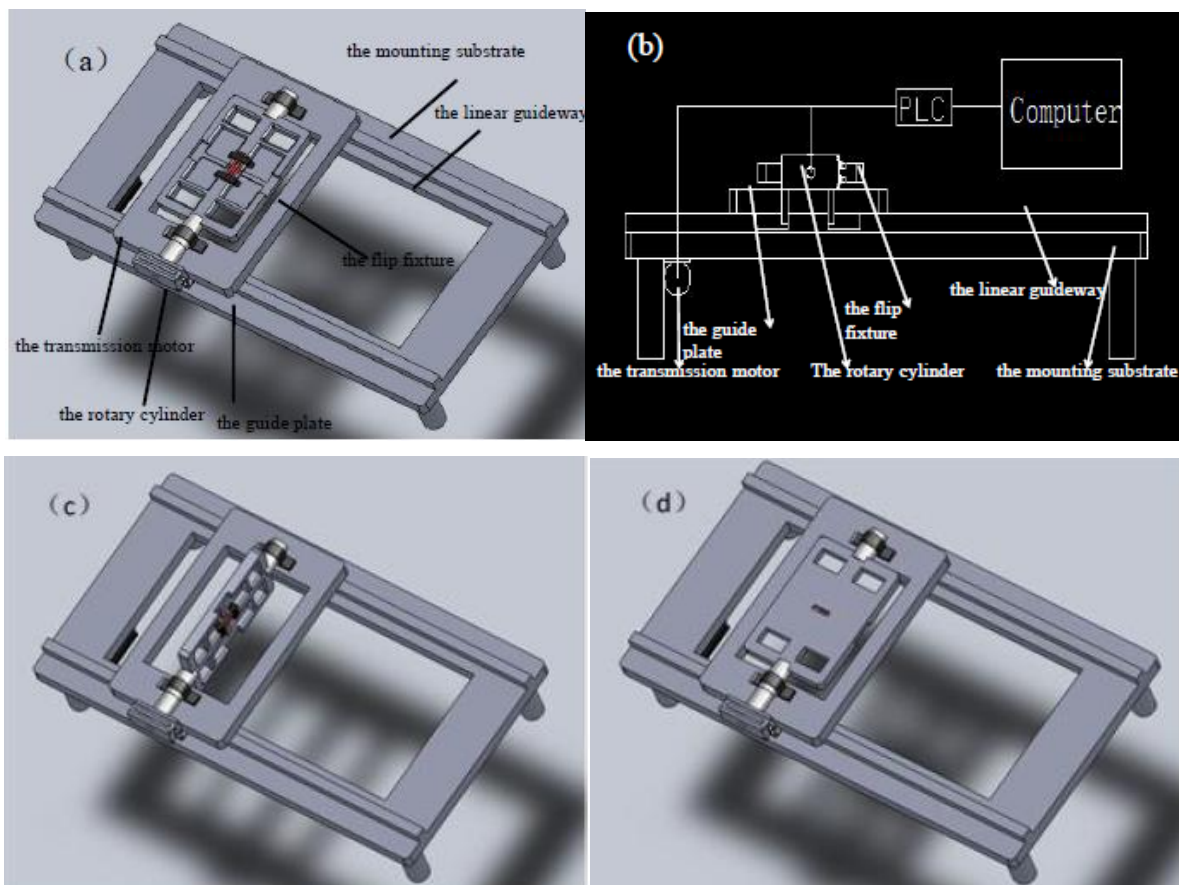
(a) The structure Fig.of this platform: (b) the side view of this platform: (c) he Fig.when the flip fixture is turning: (d) the picture after the flip fixture turns 180 degrees.
